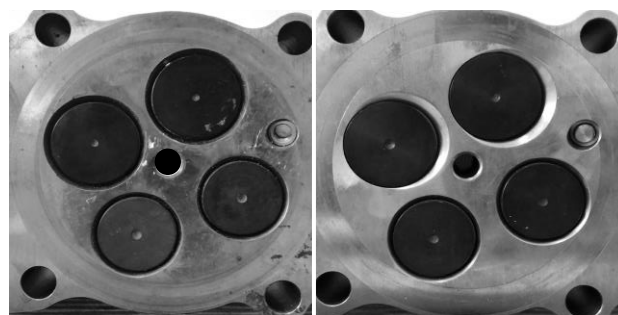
Baseline and new *HiGas* cylinder head with sickle-shaped cuts near the inlet valves' seats
